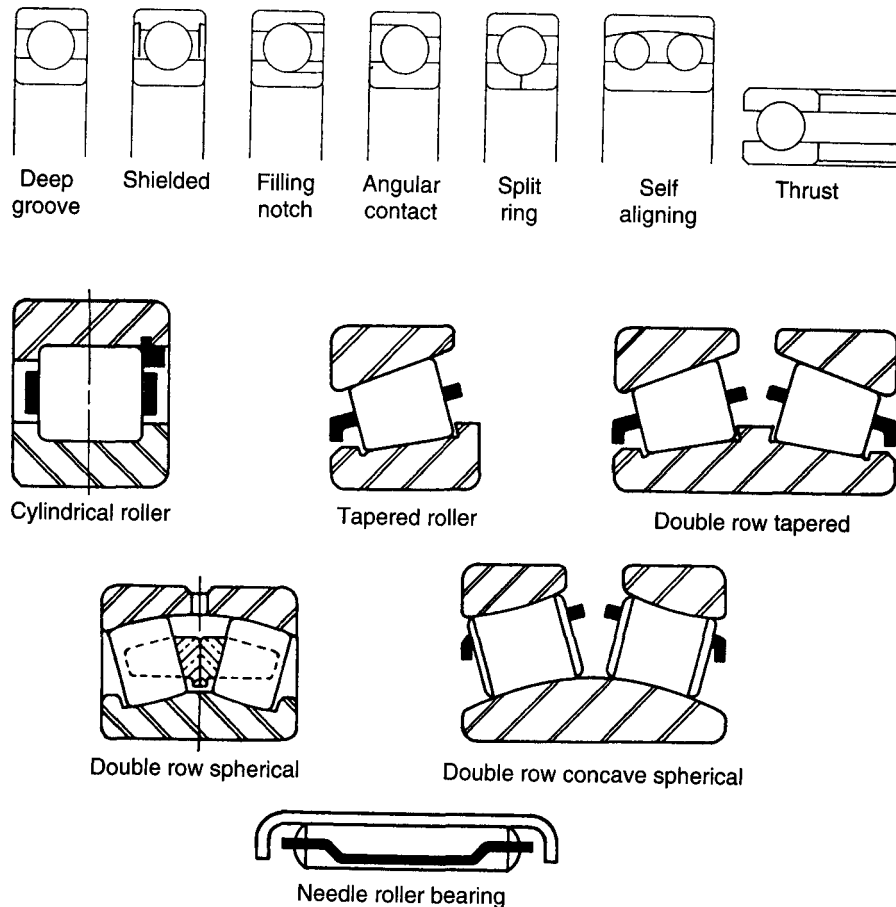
Rolling element bearings. Courtesy Society of Tribologists and Lubrication Engineers and E. R. Booser, editor, *Handbook of Lubrication and Tribology*, CRC Press.
